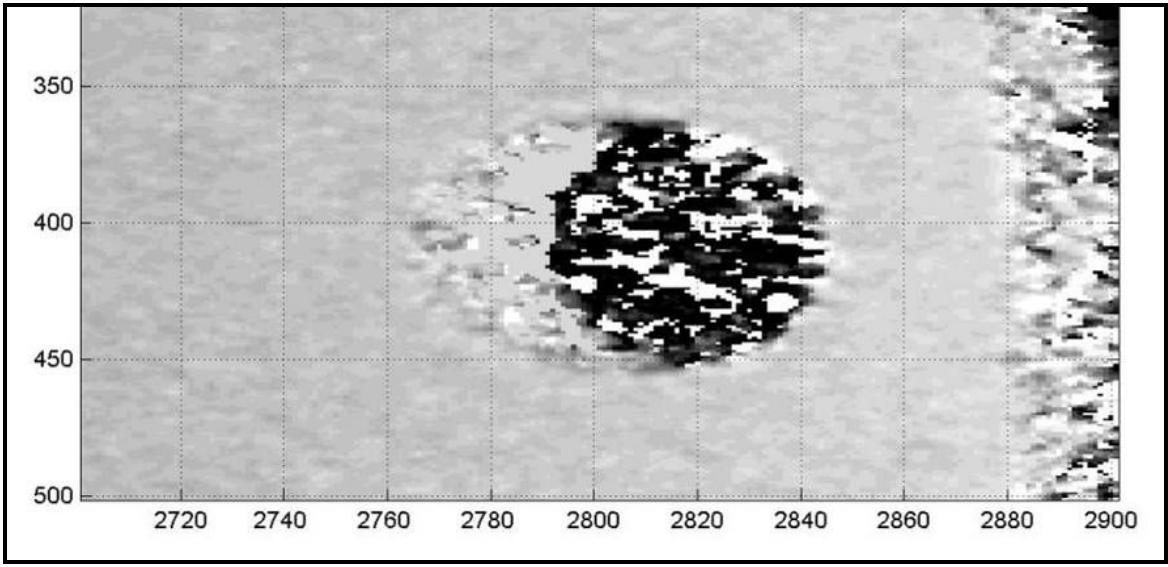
One Fringe Phase Map at (350:500, 2720:2900) with rivet hole.
